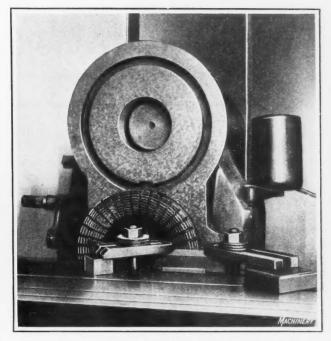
Employing a Specially Designed Hob for machining Teeth on Chuck Jaws
